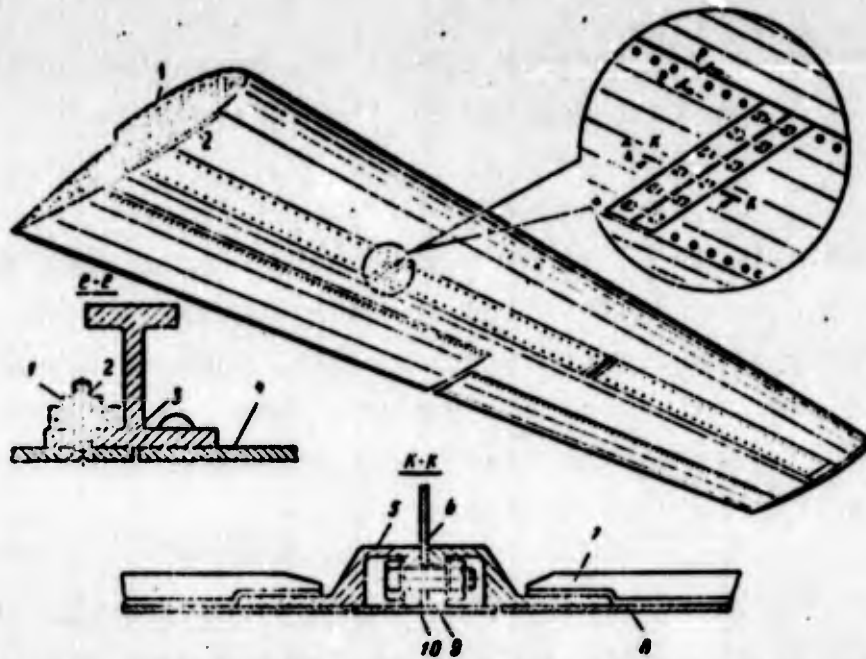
Detachable load-bearing panels which compensate for a large cutout in a wing: 1 - floating nut; 2 - screw; 3, 7 - stringers; 4, 8 - skin; 5 - joint profile; 6 - web of detachable rib; 9 - overlapping strip; 10 - bolt.
